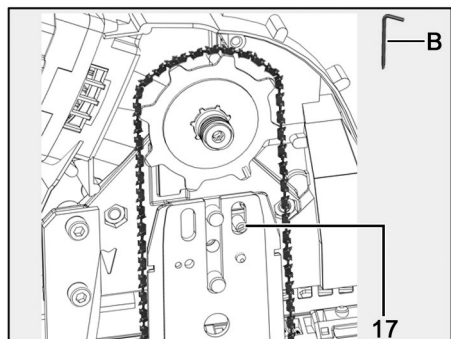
Release the chain tension and remove the guide bar together with the saw chain
